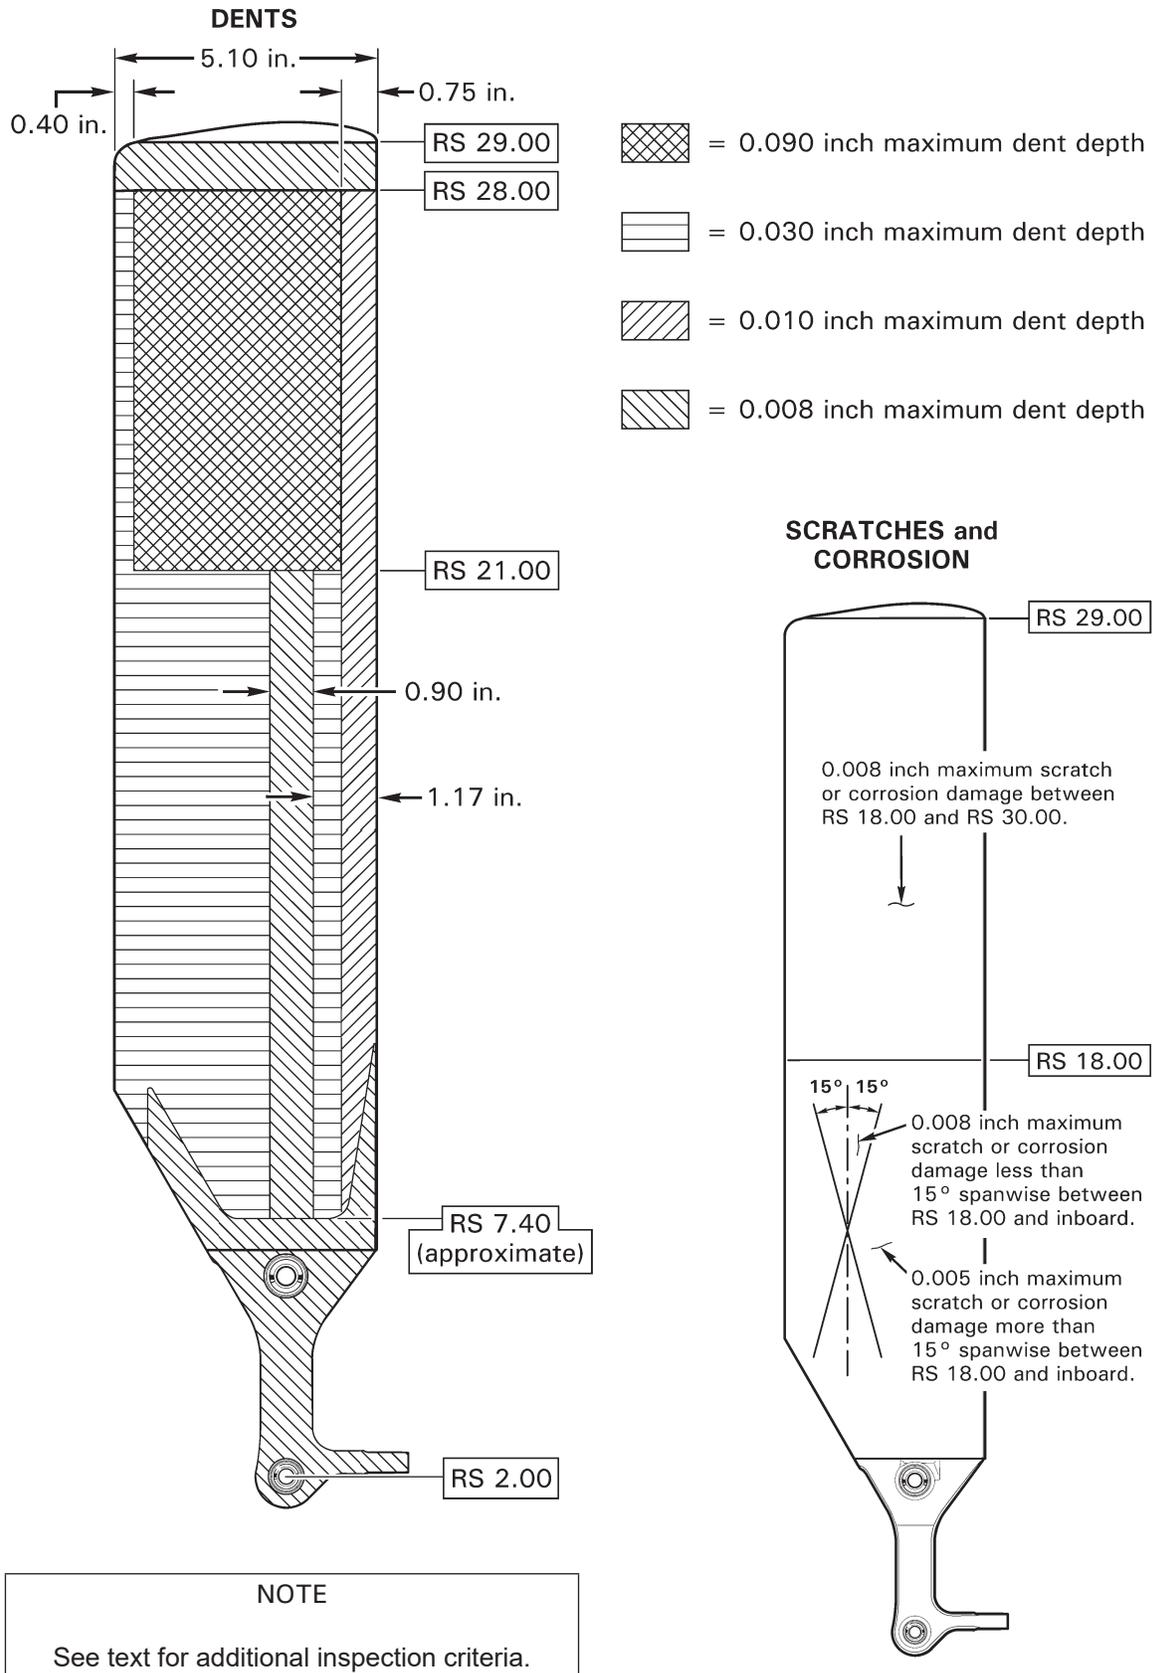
TAIL ROTOR BLADE INSPECTION CRITERIA
